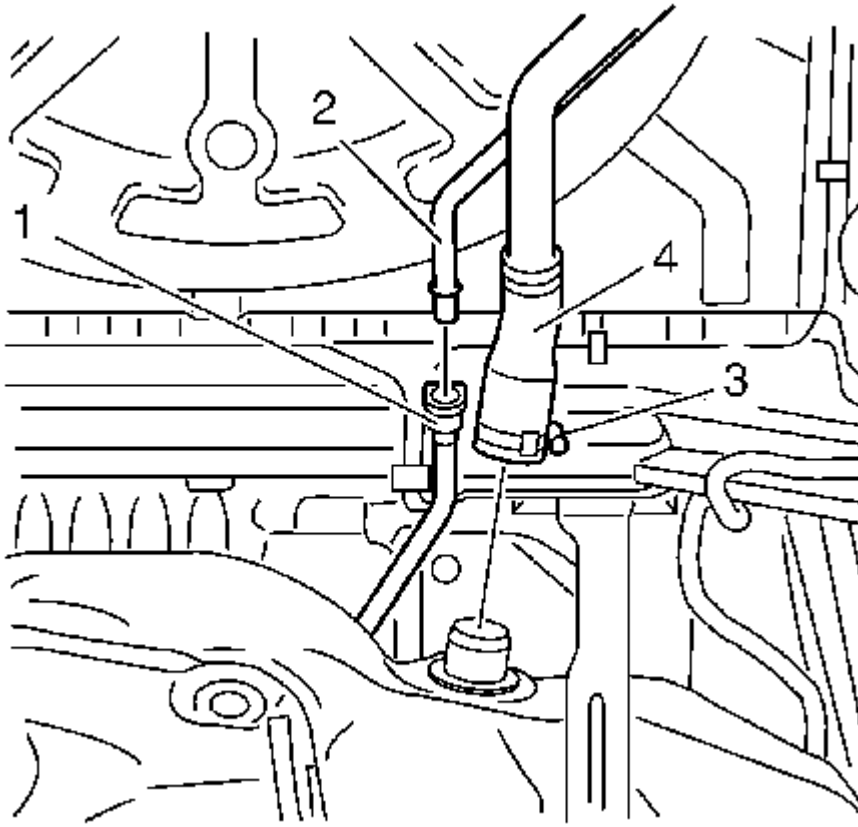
Chassis Fuel Feed Pipe, Quick Connect Fitting, Fuel Pipe & Retainer
